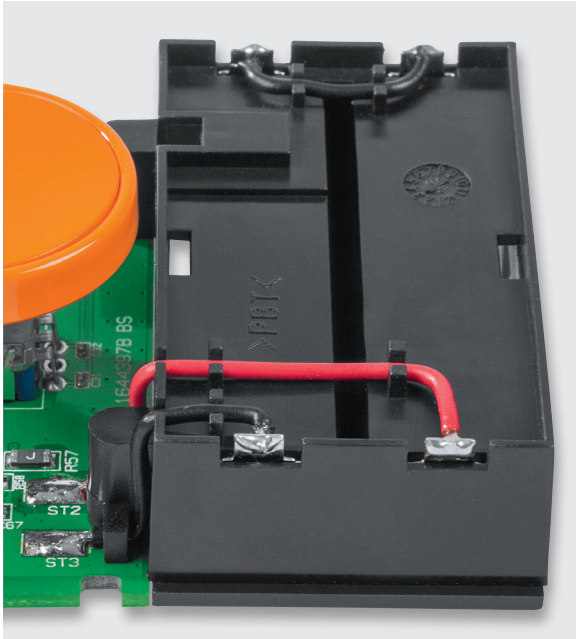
Detail of assembly and connections for mounting the battery compartment on the pcb
